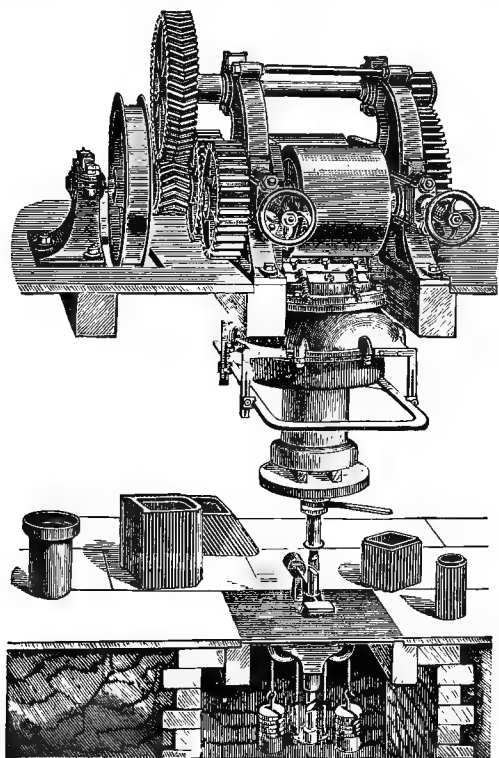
Boulet's vertical tile machine with forcing rollers.
